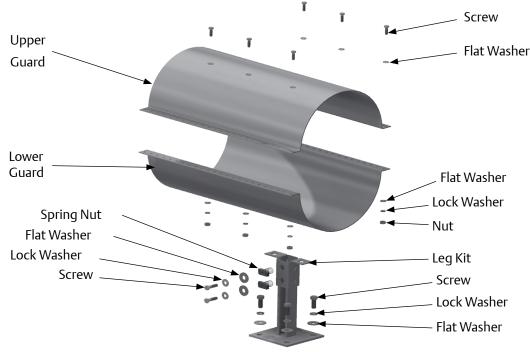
Coupling Guard Assembly (VPN A27435C shown)
